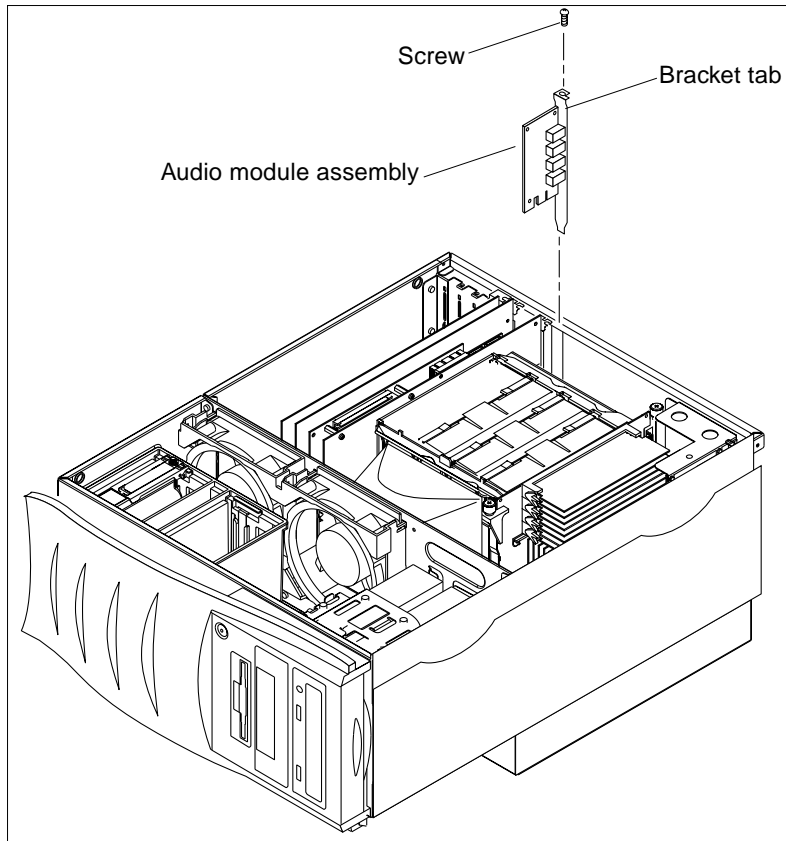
Removing and Replacing the Audio Module Assembly
